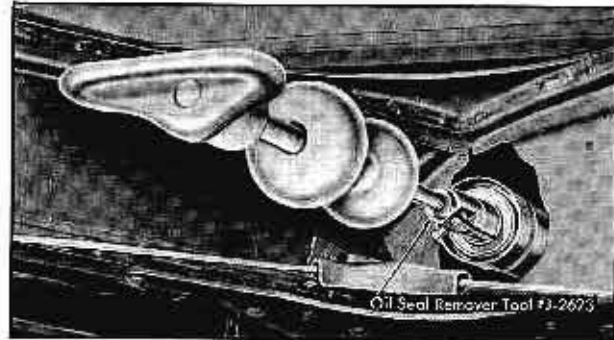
Removing Extension Housing Oil Seal (In Car)
